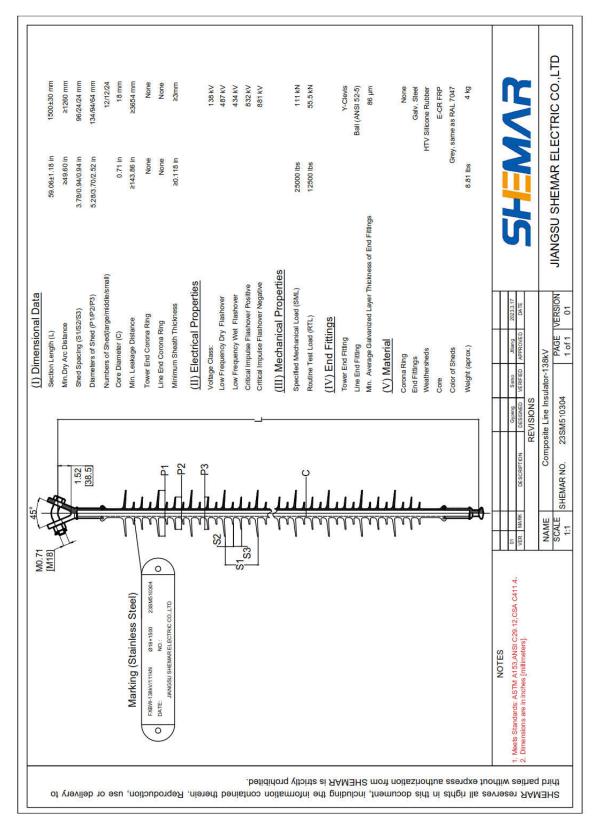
138 kV Composite line insulator, type 138 kV / 111 kN, drawing No. 23SM510304
